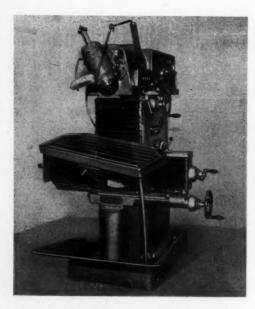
The latest Maho type MH 800 universal toolroom milling and die-sinking machine
